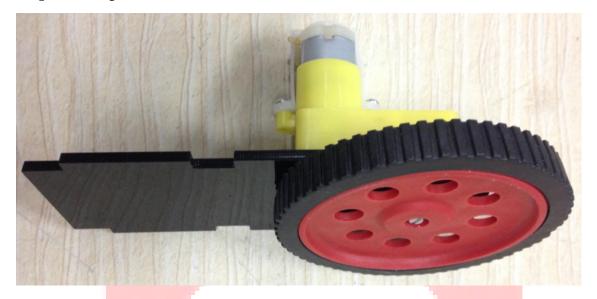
BO Motor and Wheel fixed on a Side Plate.
